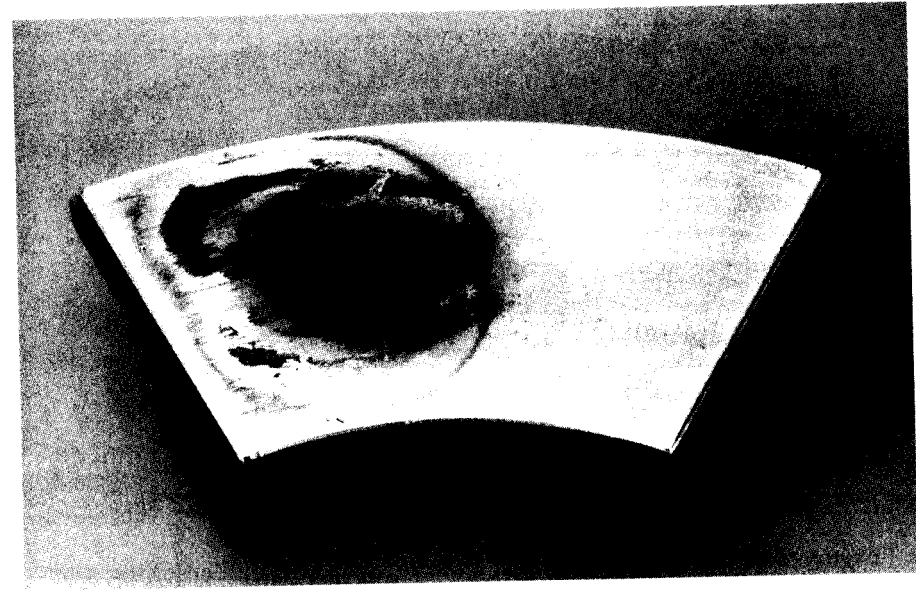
Overheated thrust shoe causing oil additives to deposit. Courtesy Kingsbury, Inc.
